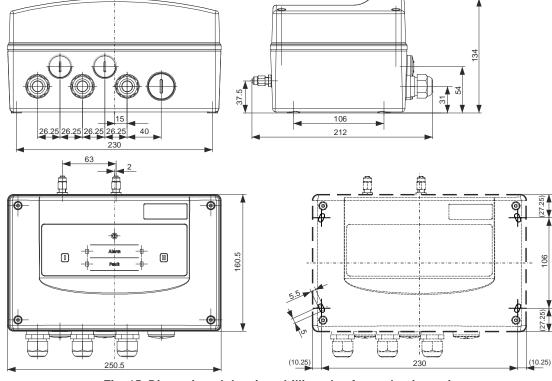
Dimensioned drawing, drilling plan for evaluation unit
